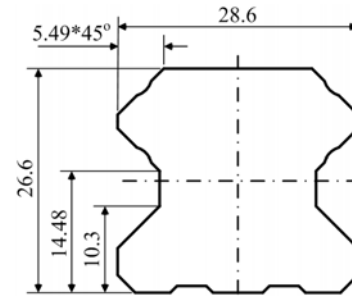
Cross sectional shape of LM guide (unit: mm).
